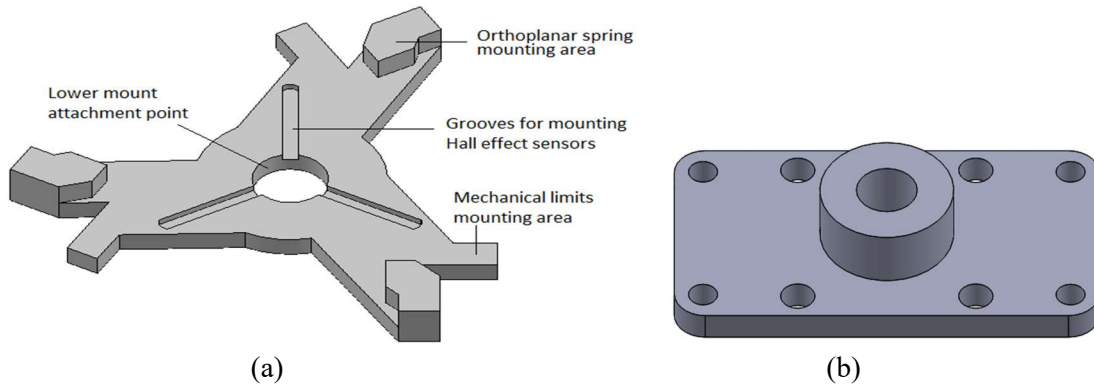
(a) Mechanical limit placement and design (b) mechanical limit itself.
